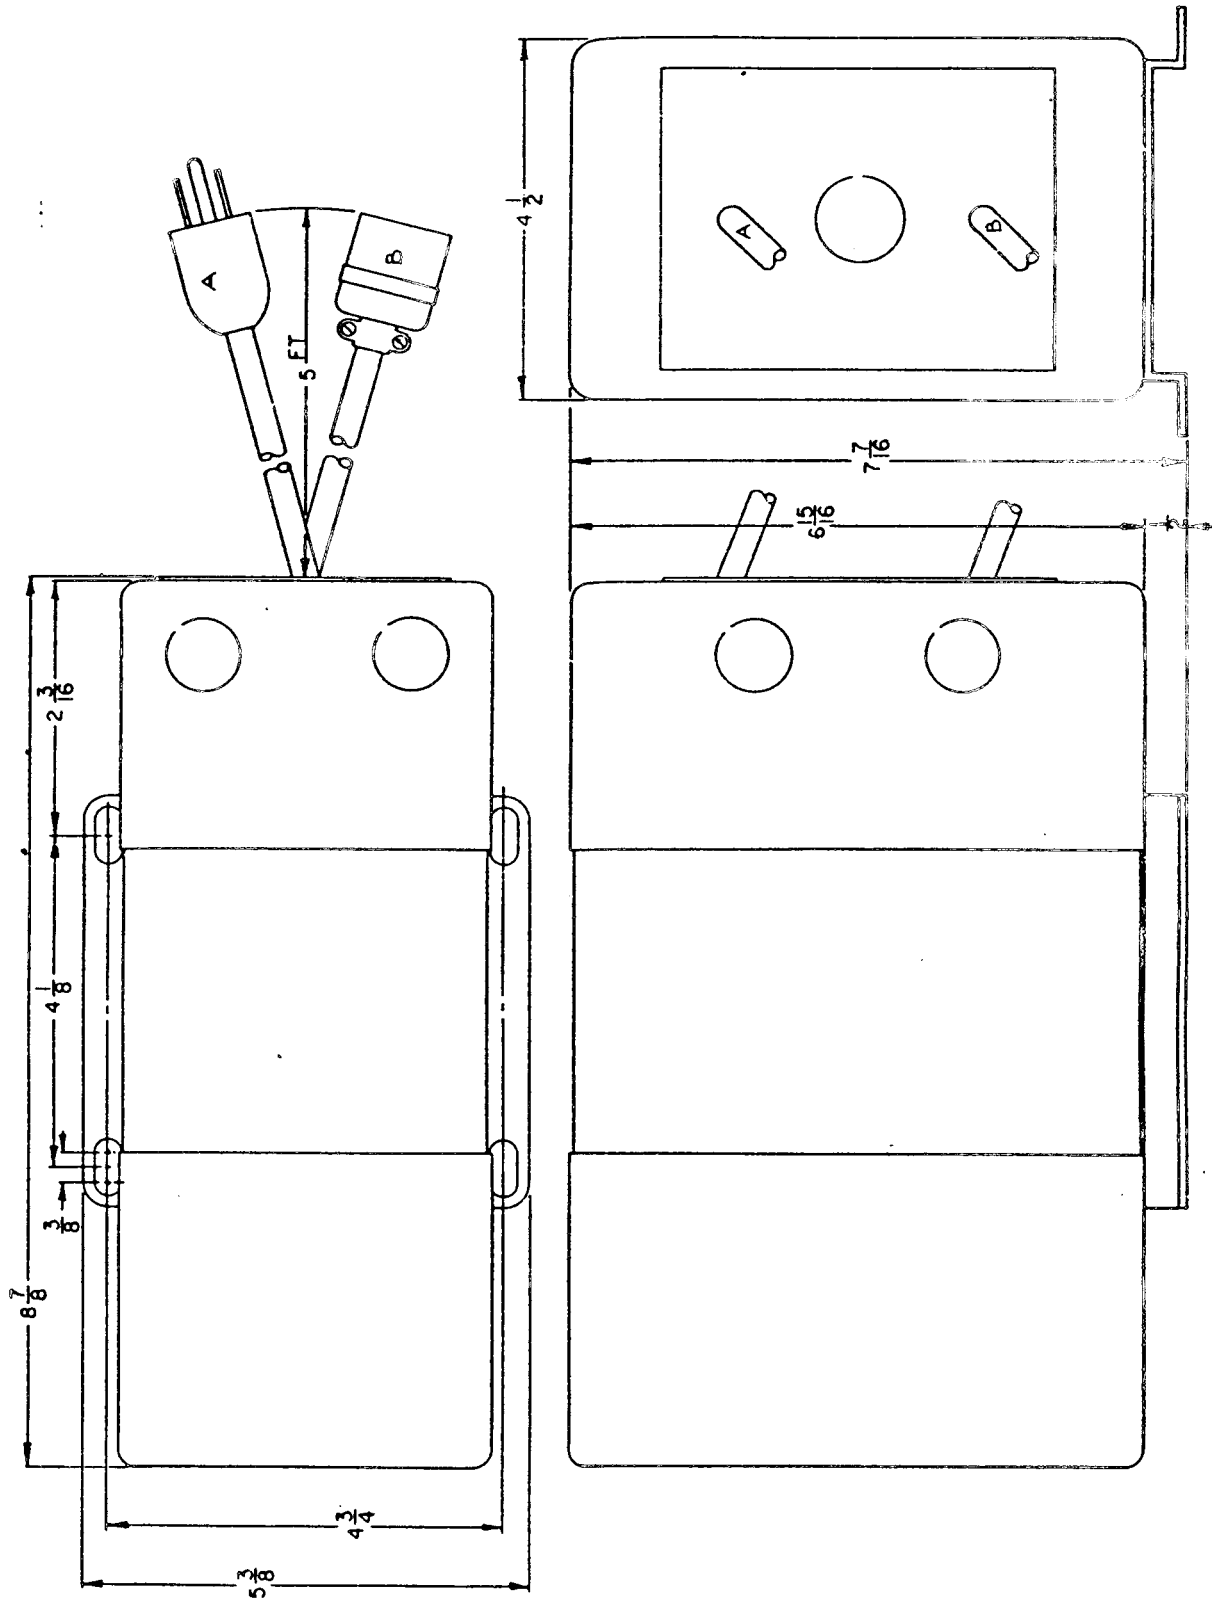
Outline Dimensional Drawing, Constant-Voltage Transformer.
